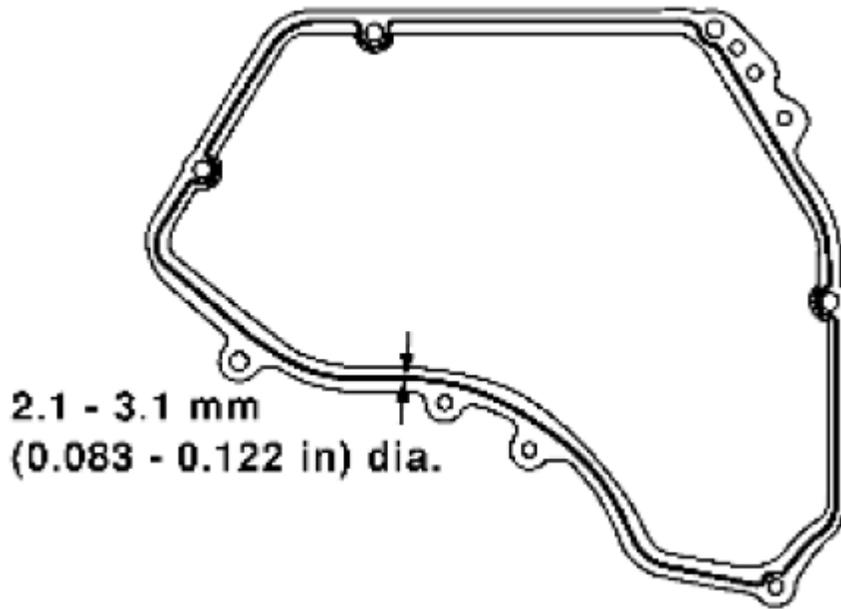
Identifying Liquid Gasket Applying Specifications On Intake Valve Timing Control Cover
